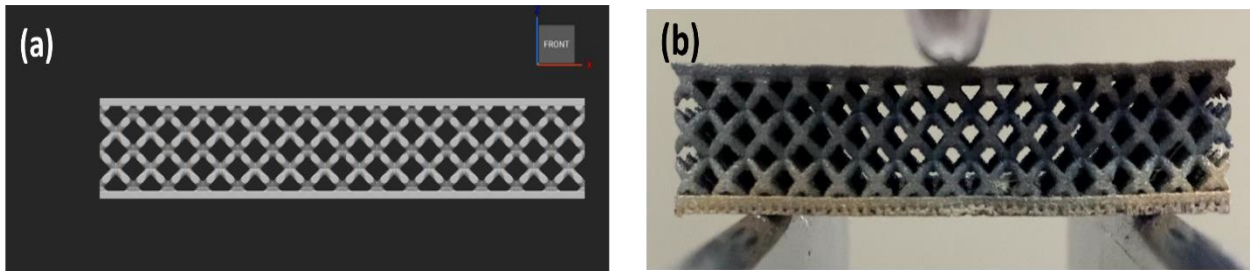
(a) CAD model of three-point bending (b) fabricated specimen three-point bending.
